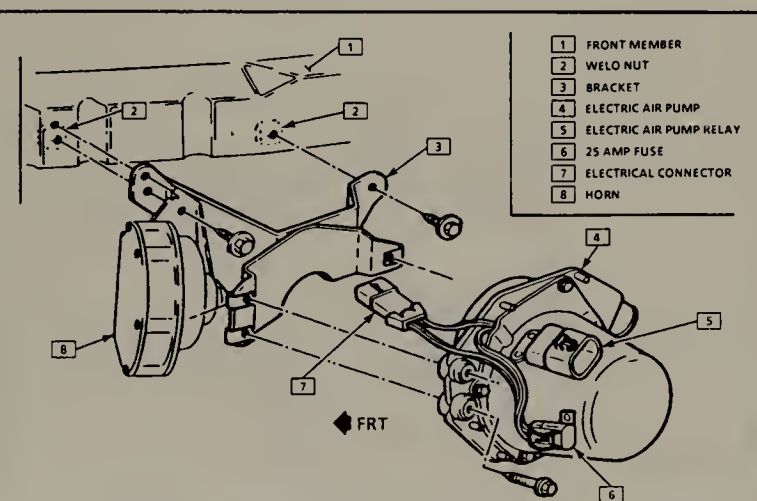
Exploded view of the air pump mounting—1994–96 5.7L (VIN P and 5) engines
